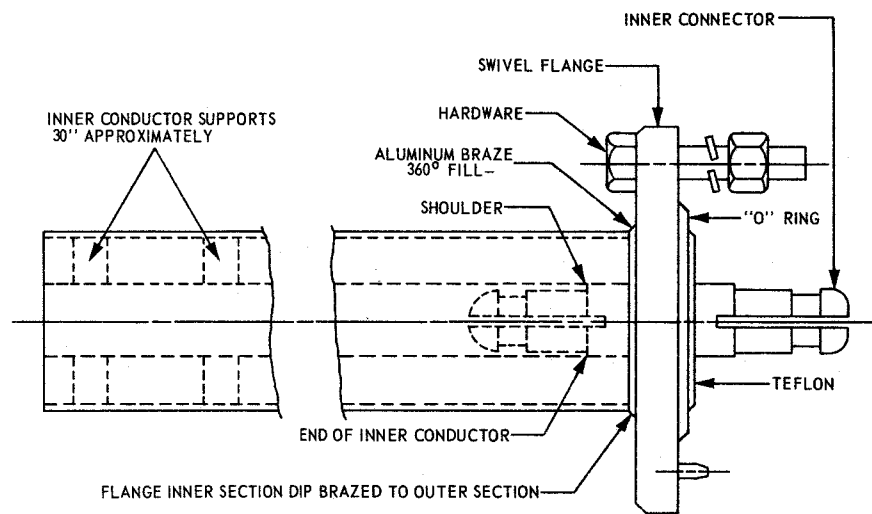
Cut-Away View of Rigid Coaxial Transmission Line with Swivel Flange, Inner Coupling and "O" Ring in Place
